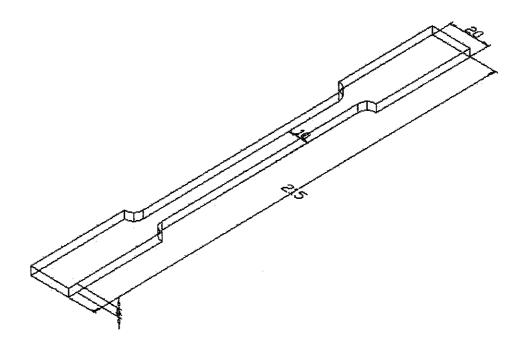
The dog bone-shaped specimen dimension in millimeter unit.
